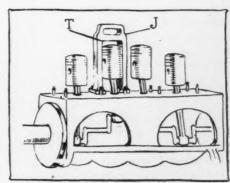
SPECIAL JIG FOR PISTON ALIGNMENT
